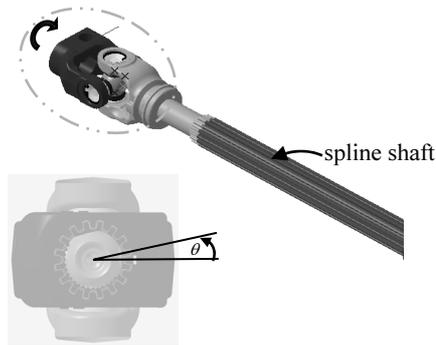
Tolerance analysis of U-joint assembly by 3DCS²
